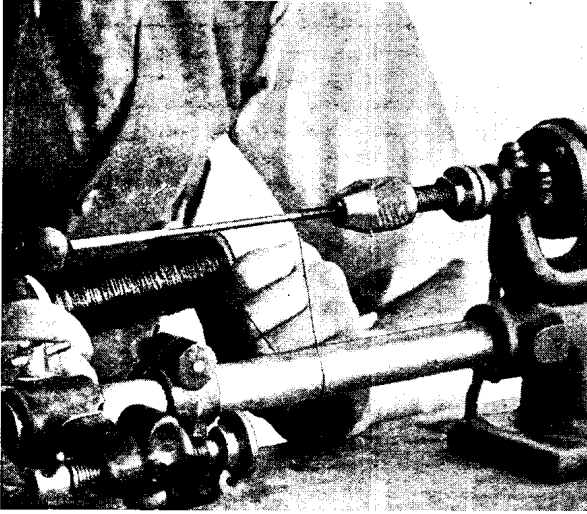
Brass wire is being wound with the aid of a small rod rotated in a lathe to make a small coil spring
